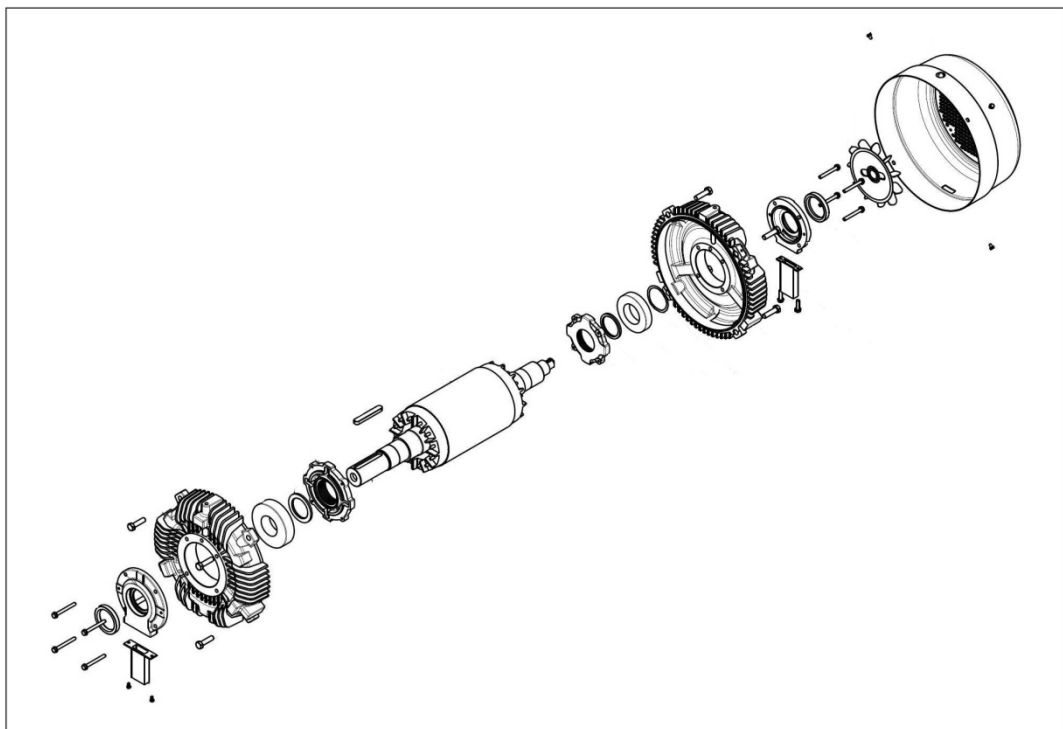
Rotor assembly (active part, shaft, bearings, end shields, fan)
